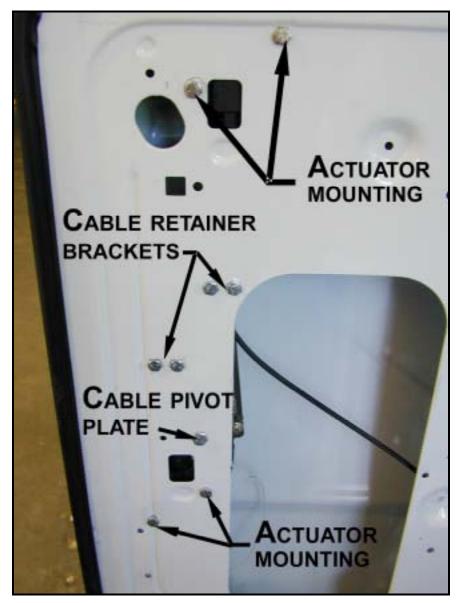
LEFT DOOR WITH LATCH ASSEMBLY INSTALLED
